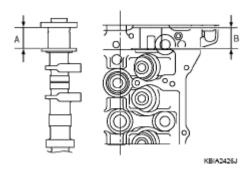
Identifying Camshaft Dimension Courtesy of NISSAN MOTOR CO., U.S.A.
